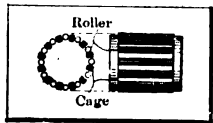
Showing a roller bearing with the rollers and cage indicated.
